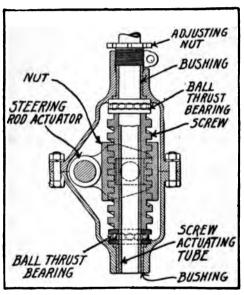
Internal Construction of Screw and Nut Reduction Steering Gear.
